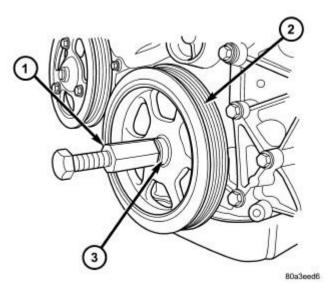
CRANKSHAFT DAMPER Courtesy of CHRYSLER LLC
